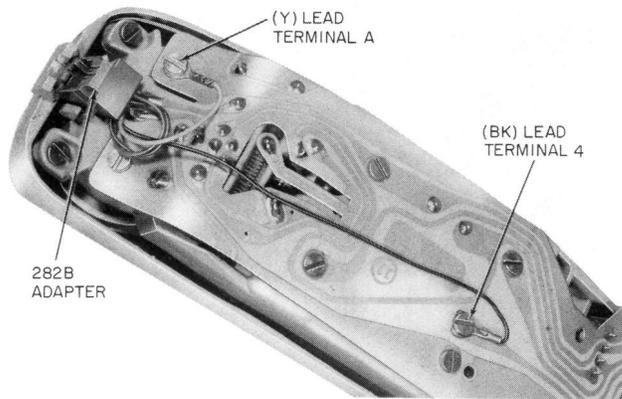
282A (MD) or 282B Adapter (P/O D-180825 Kit of Parts) Installed in Hand Telephone Set
